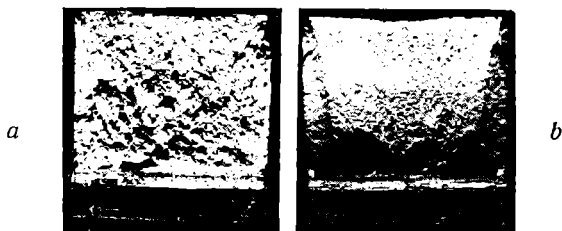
Fracture in impact tests of steel,  $\times 2$ :
